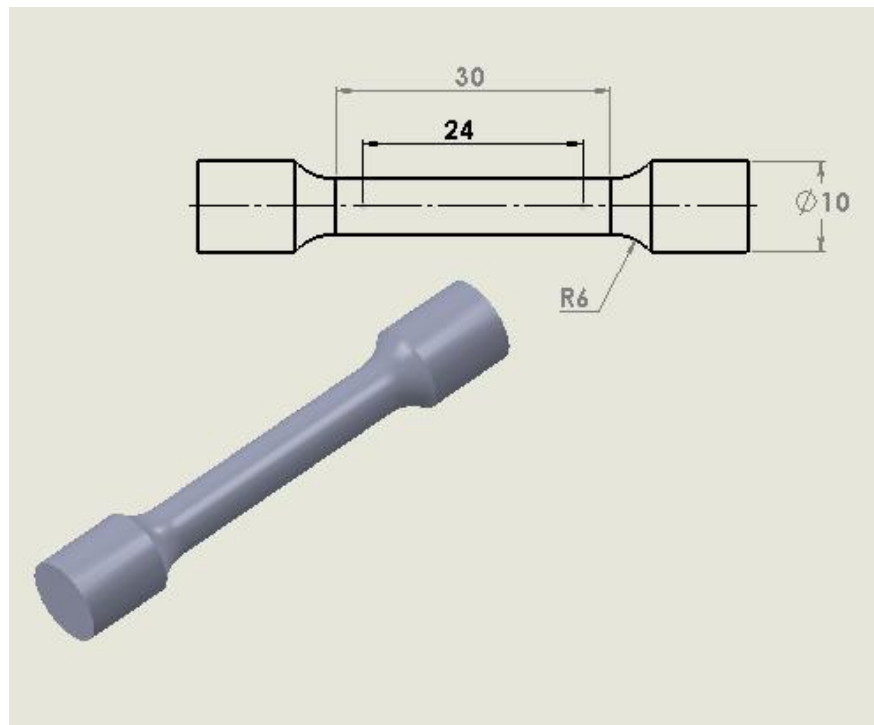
Technical drawing of tensile test sample (dimensions are in mm).
